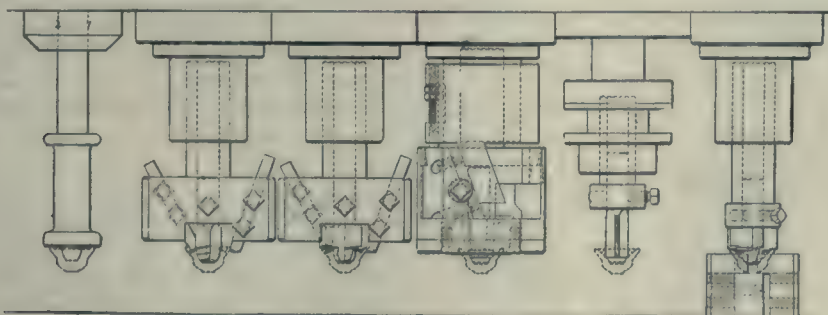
TOOL LAYOUT FOR MACHINING TIME FUSE NOSE.
